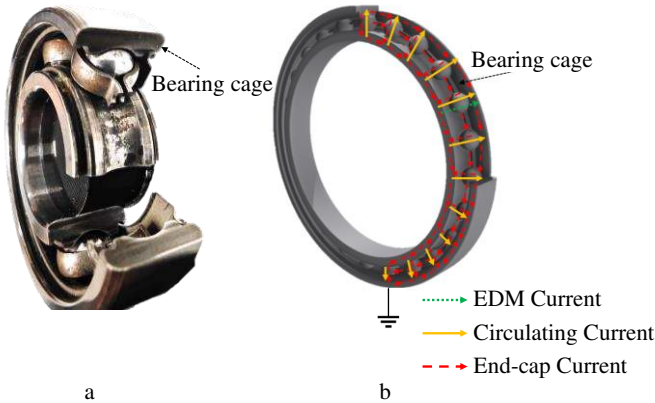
Bearing cage: (a) Photo of bearing cage; (b) illustration of structure of bearing cage and current path of different bearing current components.
